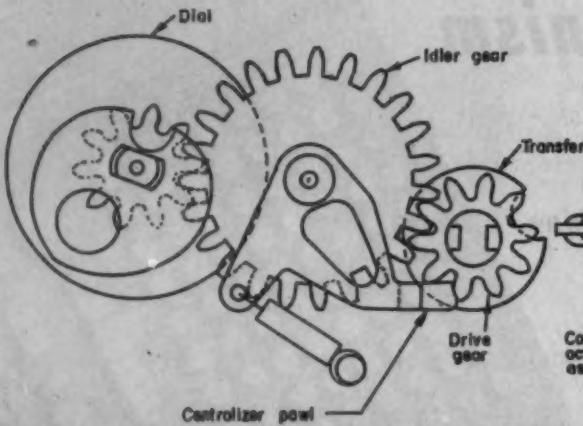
Above—Cutaway view of new Marchant Figure-master calculating machine shows the high-speed, continuously readable counting mechanism
